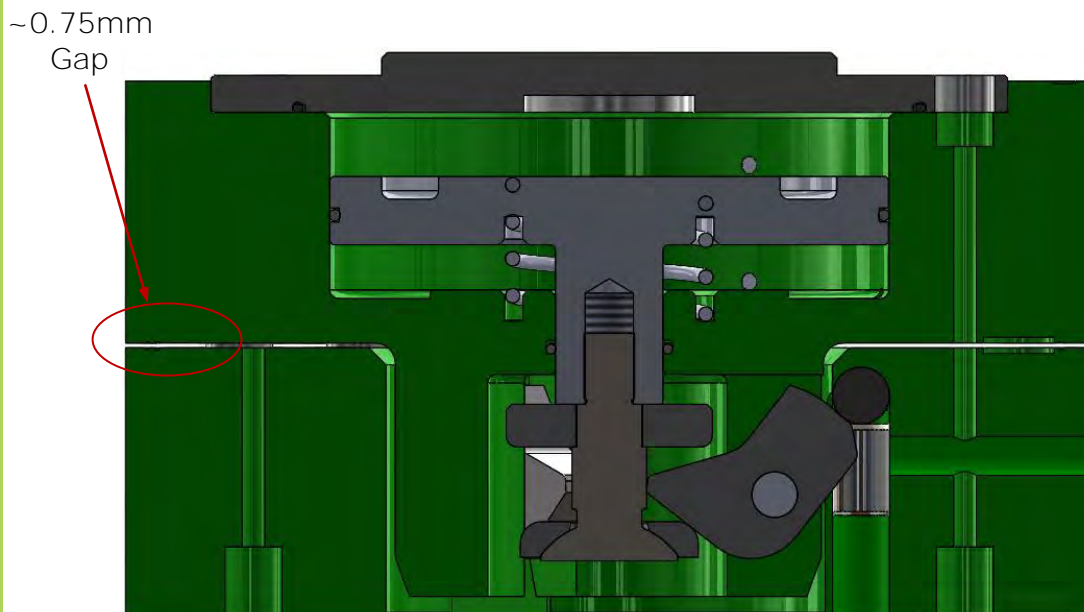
E125LP Robot & Tool Adaptor – Loss of Air Mechanical Lock
